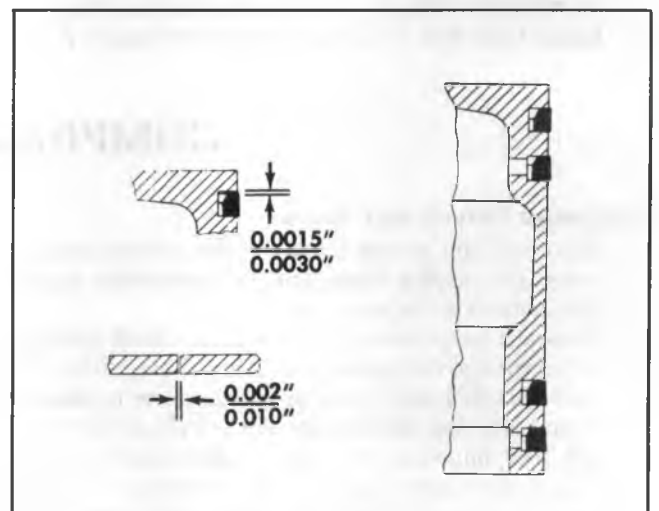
G--Piston Ring Arrangement and clearances 7 1/4 cu. ft. Compressor
